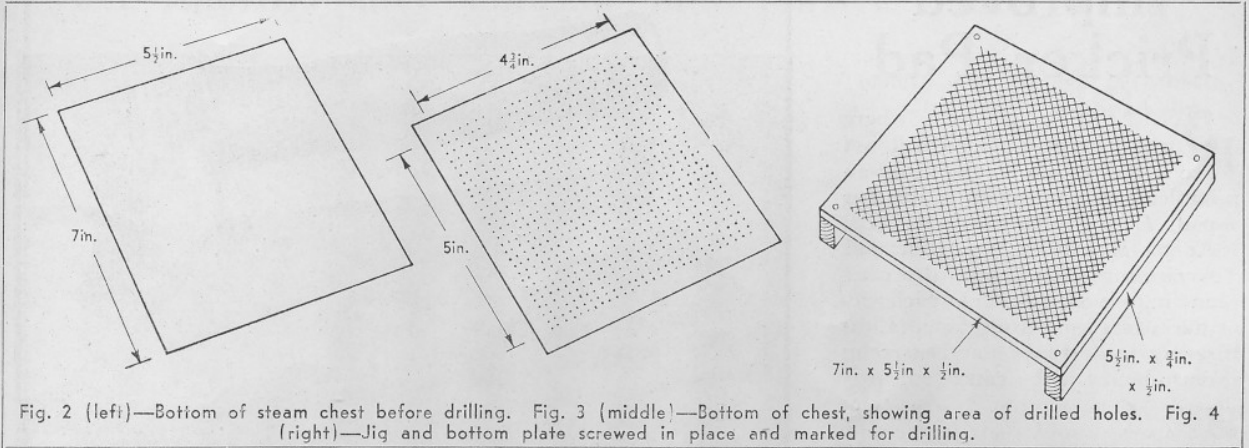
(left)—Bottom of steam chest before drilling. Fig. 3 (middle)—Bottom of chest, showing area of drilled holes. Fig. 4 (right)—Jig and bottom plate screwed in place and marked for drilling.
